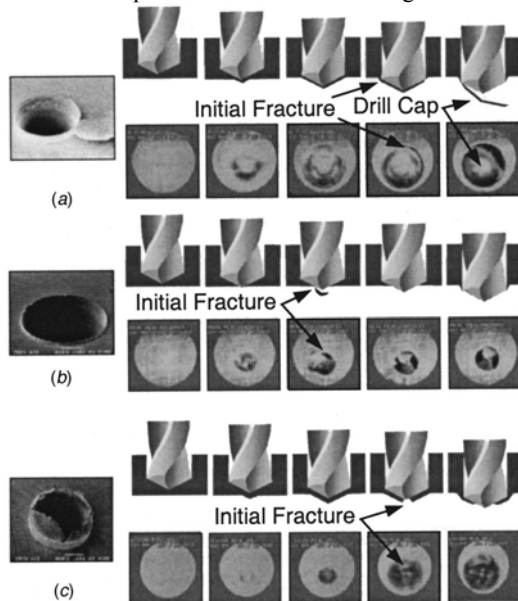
Burr formation mechanisms (a) uniform burr with a cap (b) uniform burr without a cap (c) crown burr[3]
